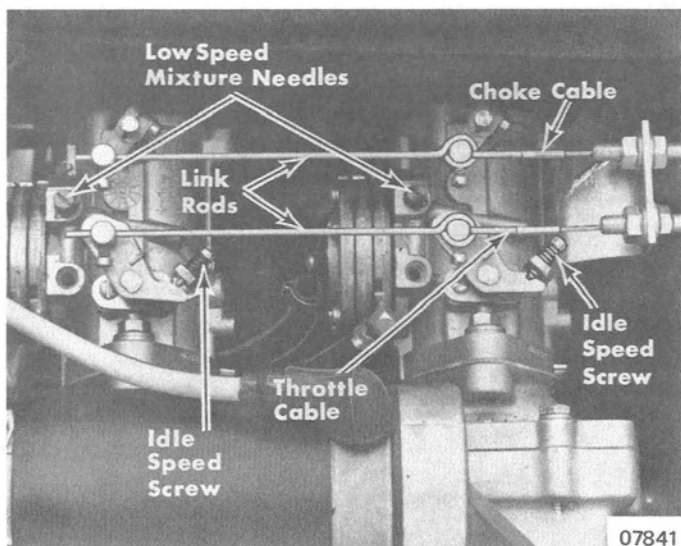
Carburetor Adjustments - Mark II Model with Chassis Serial No. 3591478 and Below
